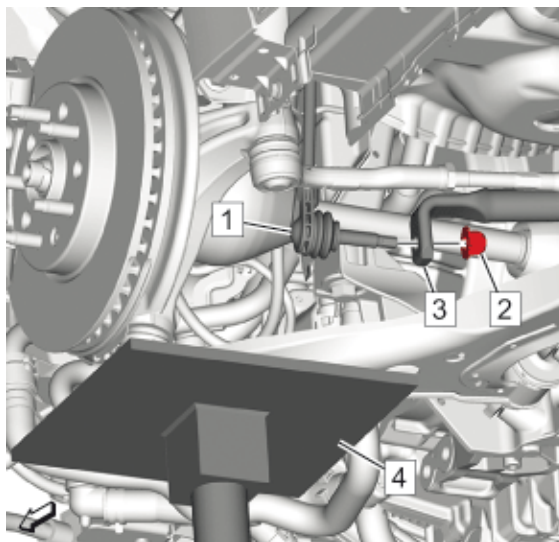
Stabilizer Shaft Link, Stabilizer Shaft And Nut
